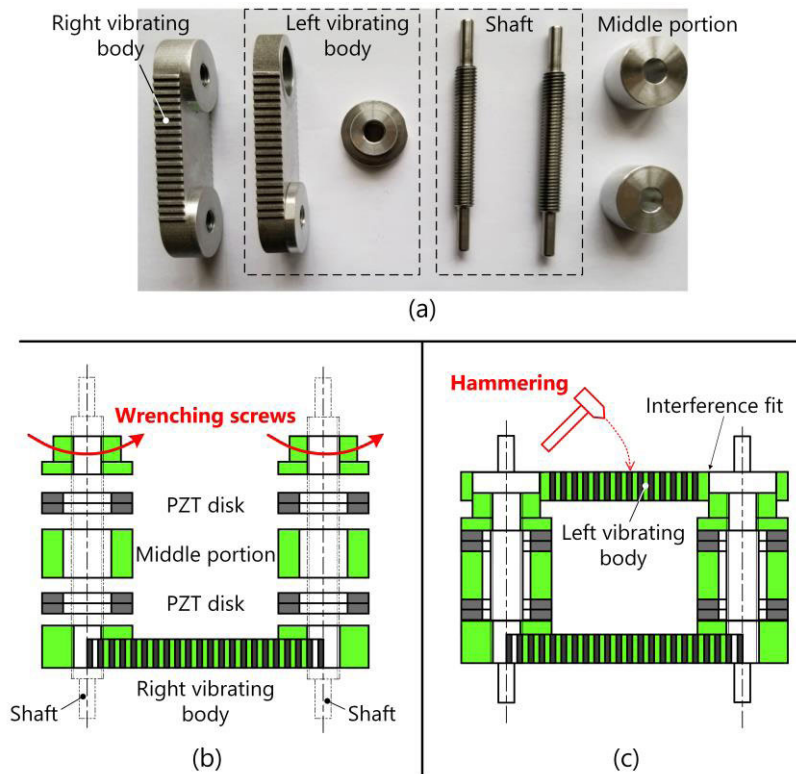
Assembly of the stator. (a) Photo of the components, (b) assembling the torsional transducers by wrenching screws, and (c) hammering the left vibrating body to form the entire stator.
